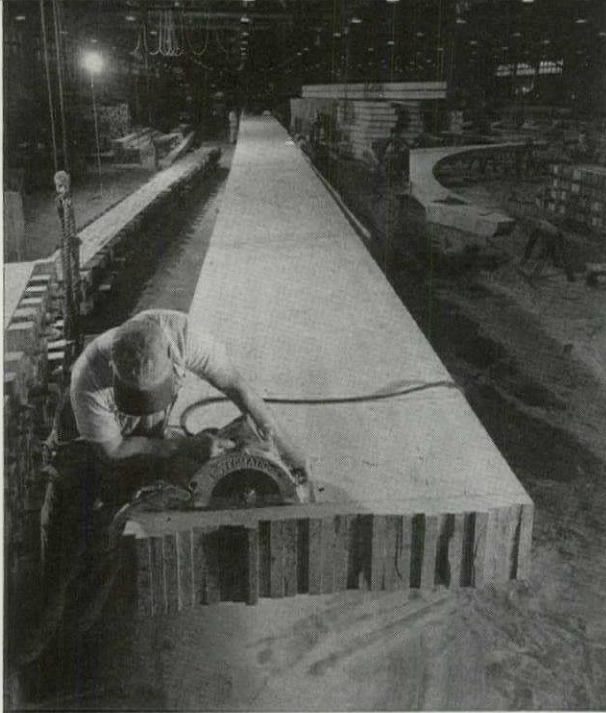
PHOTO SHOWS PLANT FABRICATION OF A 100 FT. GLUED LAMINATED BEAM. NOTE THE BUILT-IN CAMBER.
